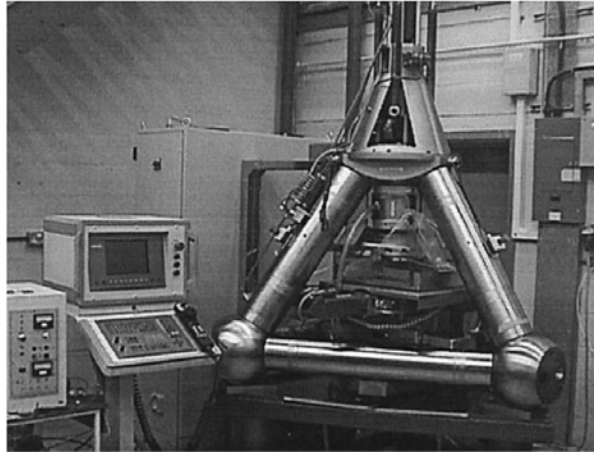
Ultra-precision grinding machine (450UPL, Moore nanotech. USA)
